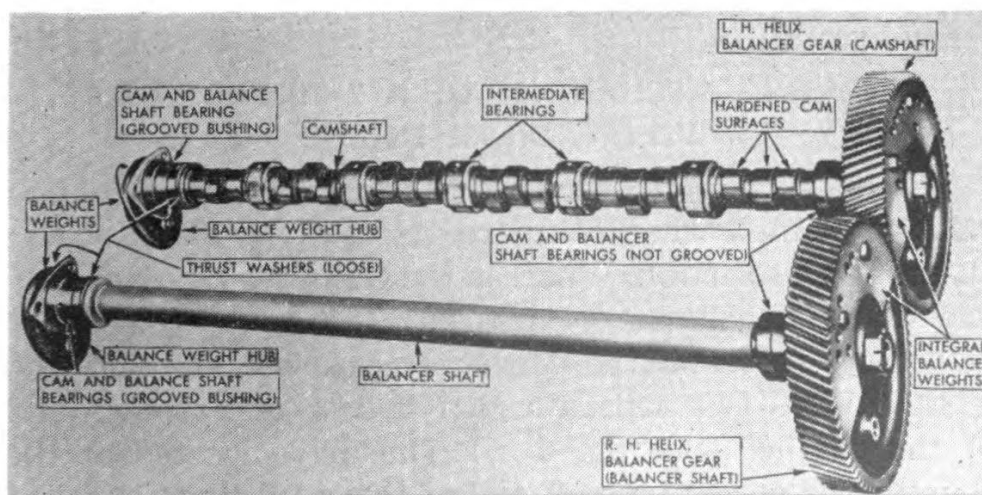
Cam and balancer shaft assemblies (GM 6-71).
